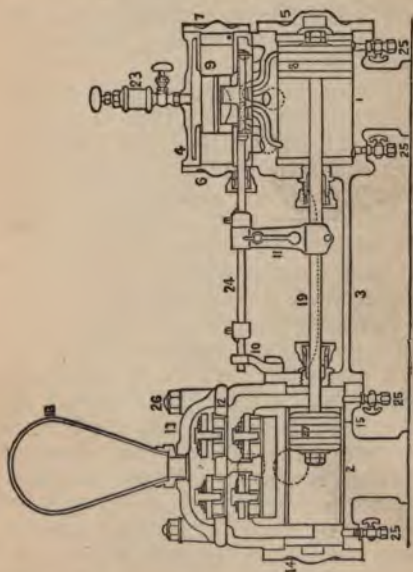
DEANE PUMP, PARTS MARKED IN DETAIL.
